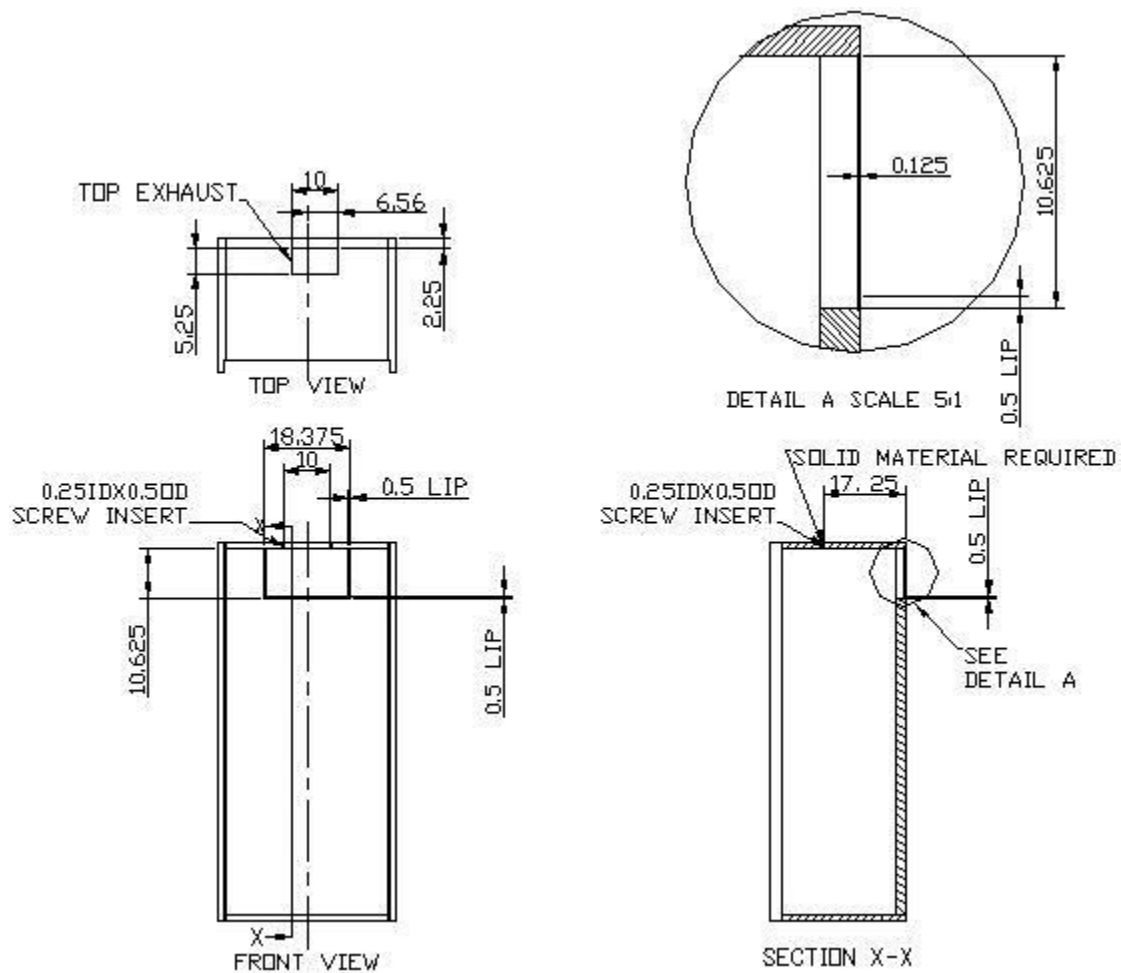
CUTOUT AND HOLE DIMENSIONS
